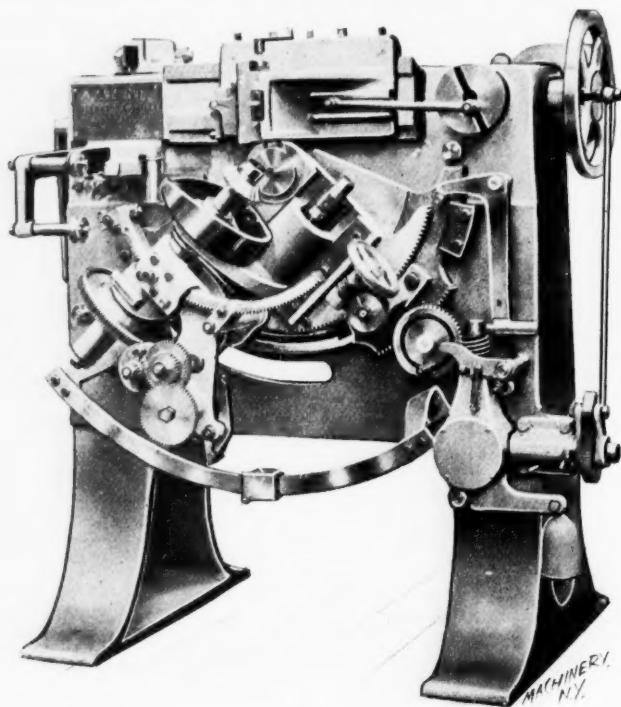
The Greenwood & Batley Templet Bevel Gear Shaping Machine.
